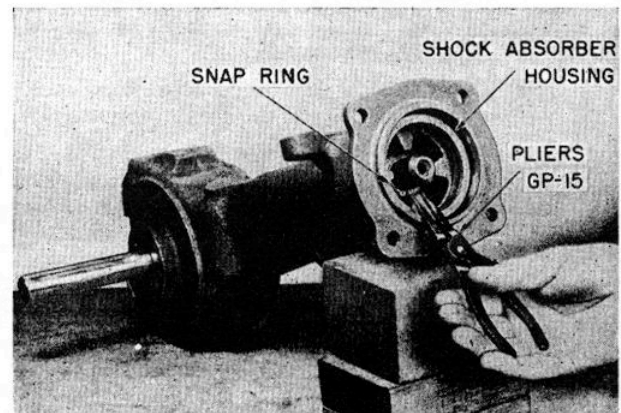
REMOVING SHOCK ABSORBER HOUSING
